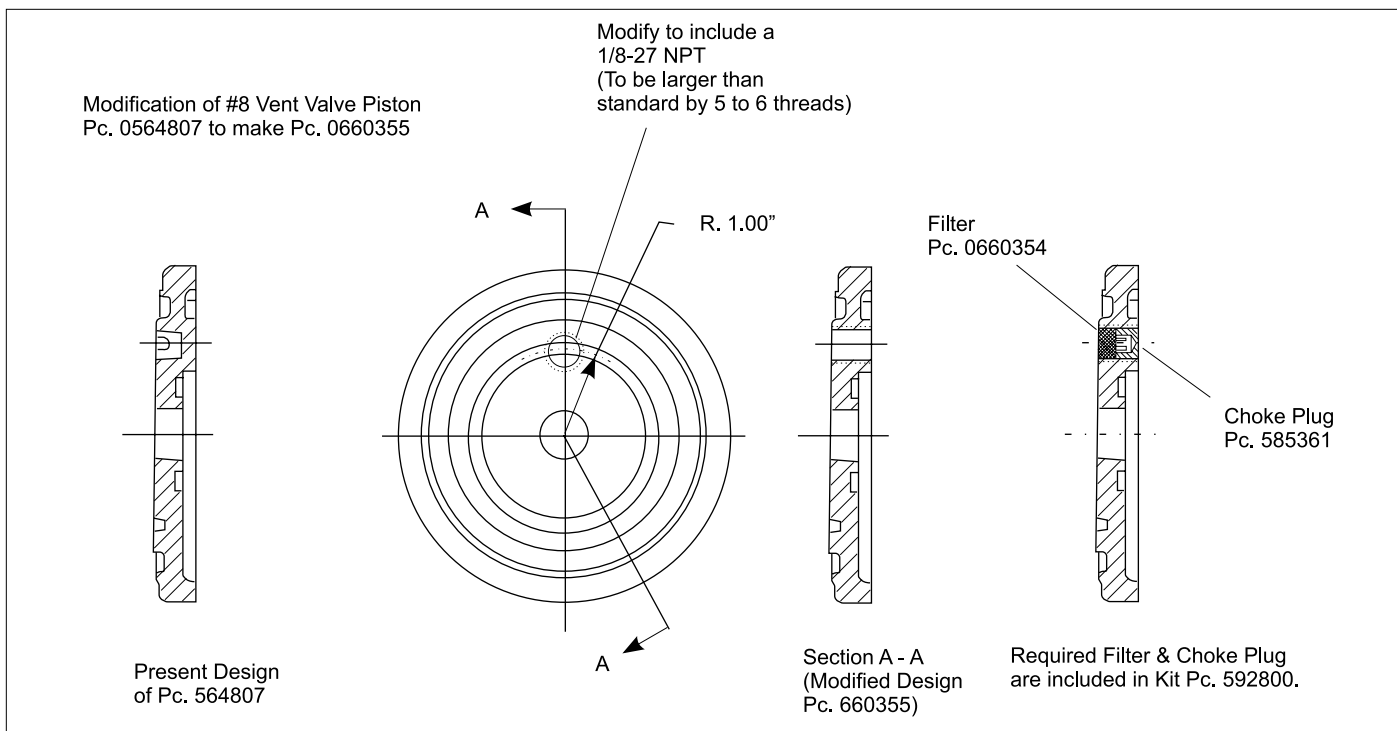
Piston Modification (Drawing BG-1005-OG)
